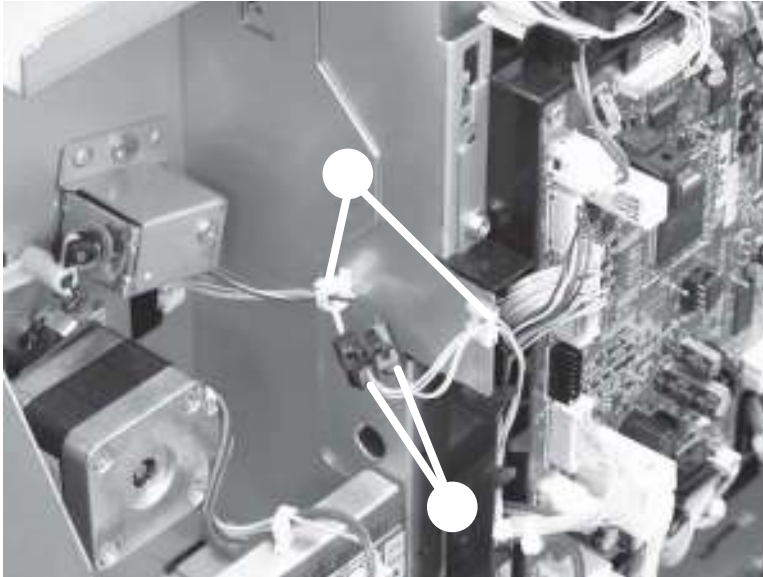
Remove the saddle feed assembly (1 of 5)
